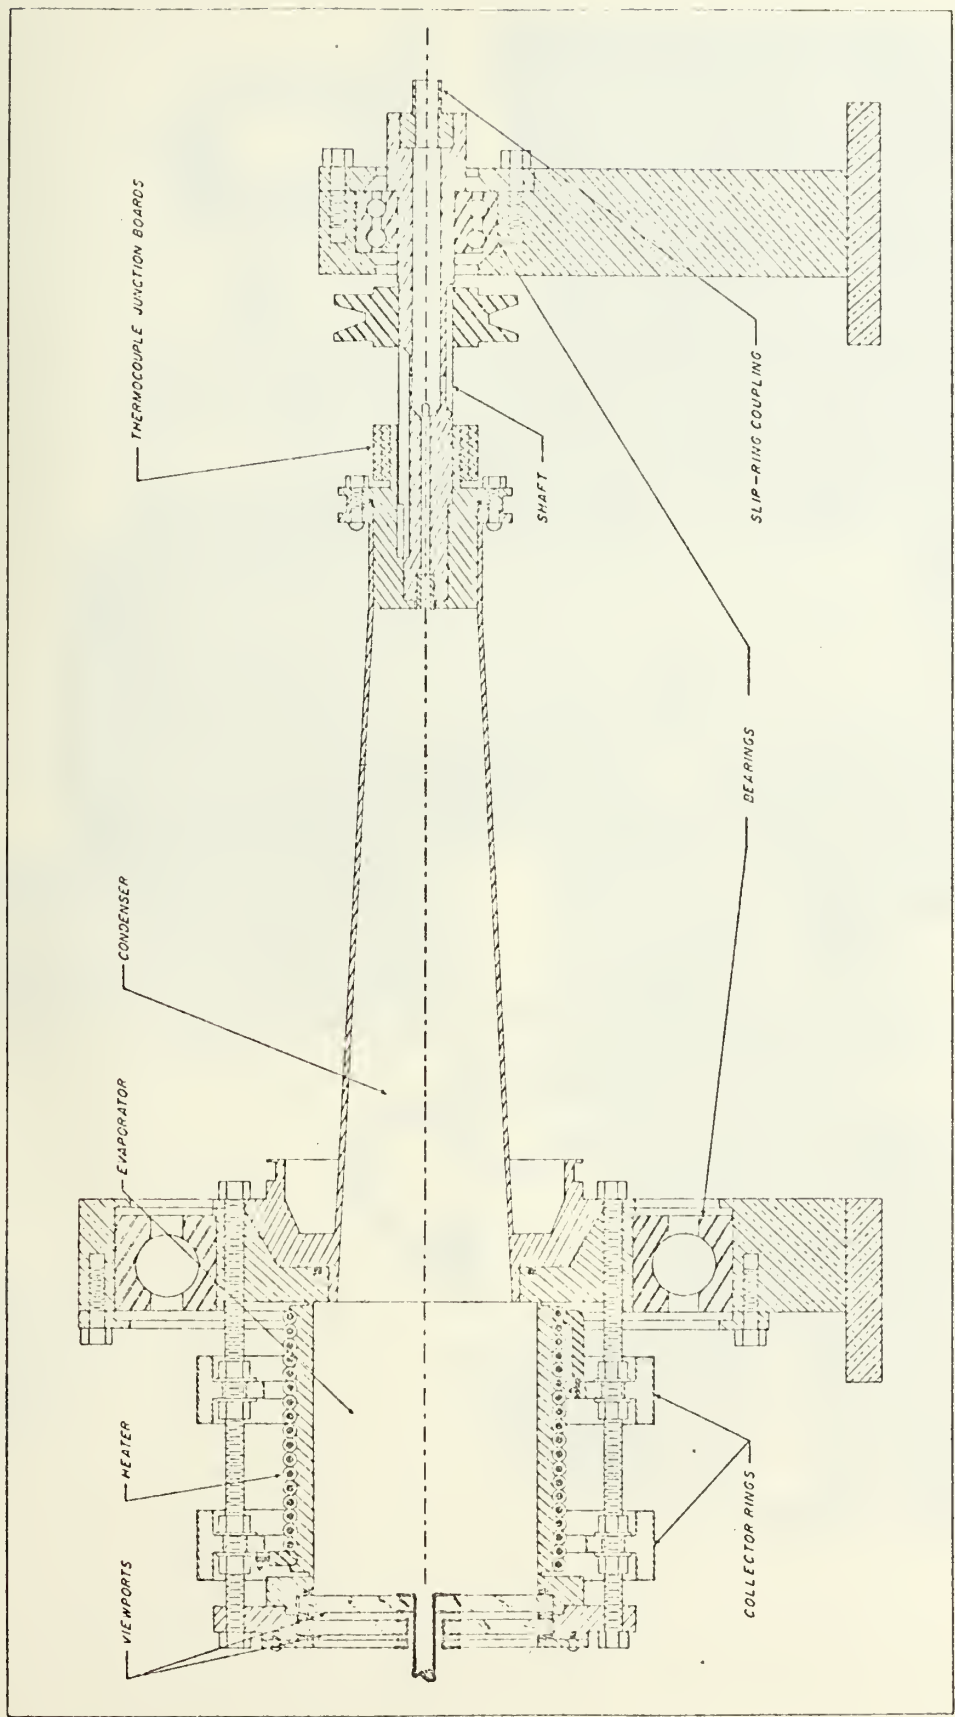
CROSS SECTION OF ROTATING HEAT PIPE
